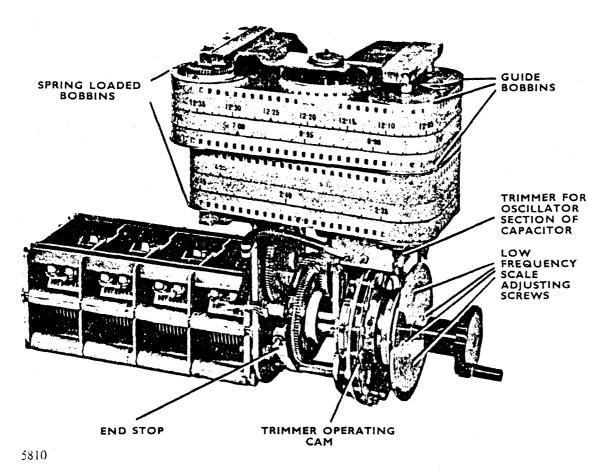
TUNING CAPACITOR AND SCALE DRIVE ASSEMBLY. LEFT HAND SIDE
